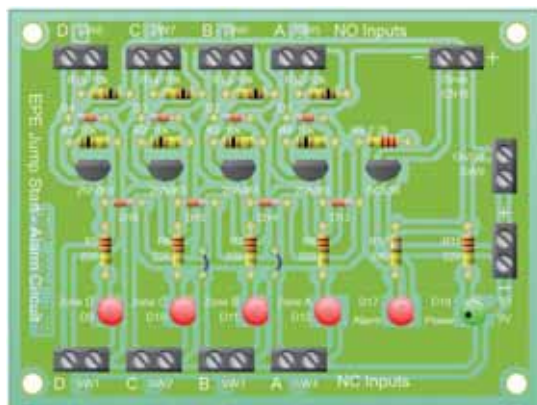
PCB artwork showing real world and PCB views. The final size of the prototype board is 112mm x 84mm
